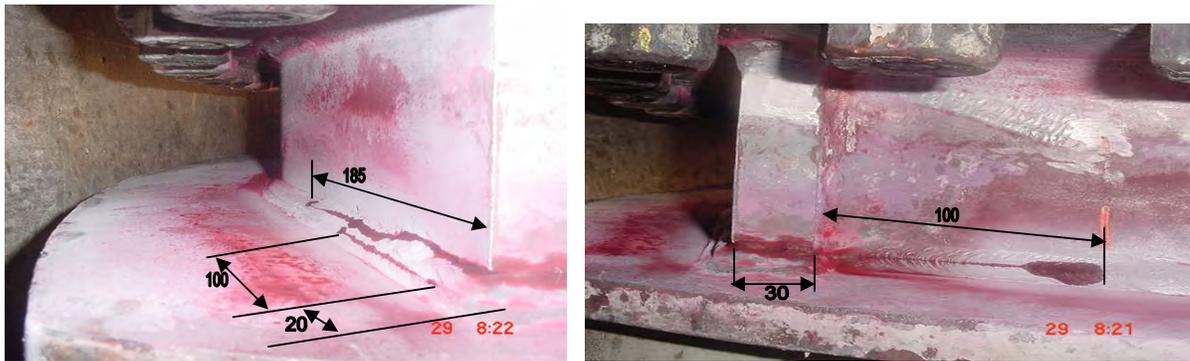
3<sup>rd</sup> Event – Cracks at corner A – lower weld
